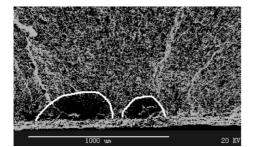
Fatigue fracture surface showing crack growth from corrosion pits.
